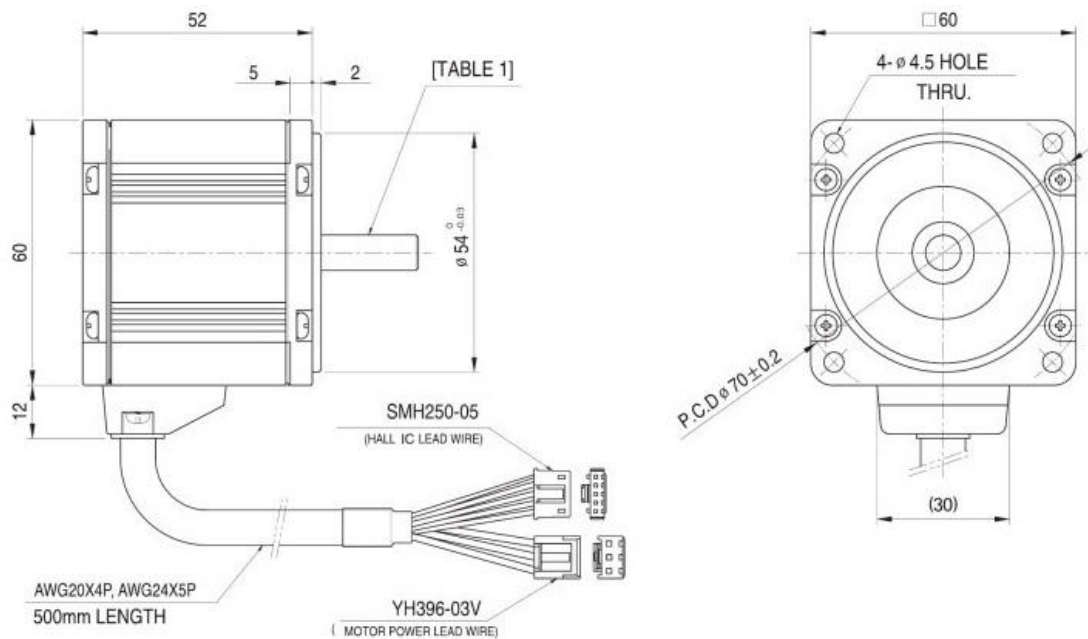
Outline drawing of chosen BLDC motor (ExceM, p.9, n.d)
